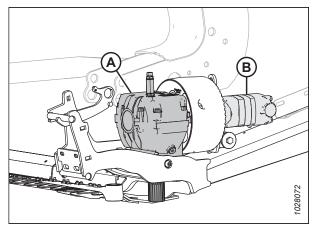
Left Knife Drive Box Shown – Right Similar
